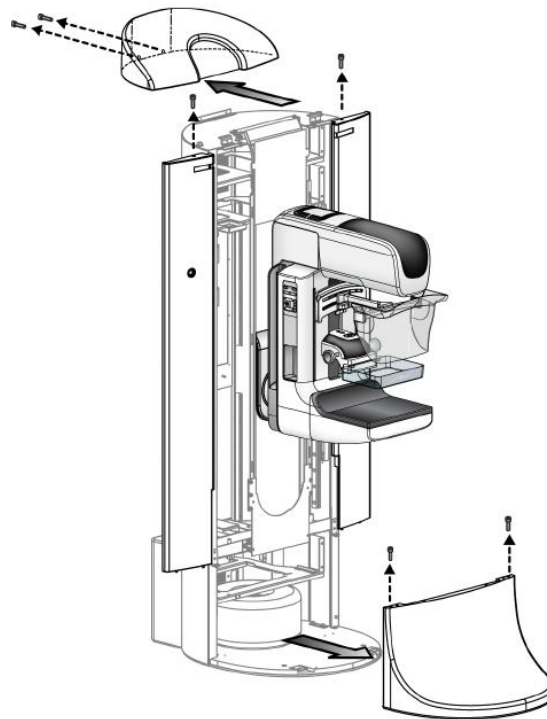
Removing Top, Side and Bottom Covers of Gantry
